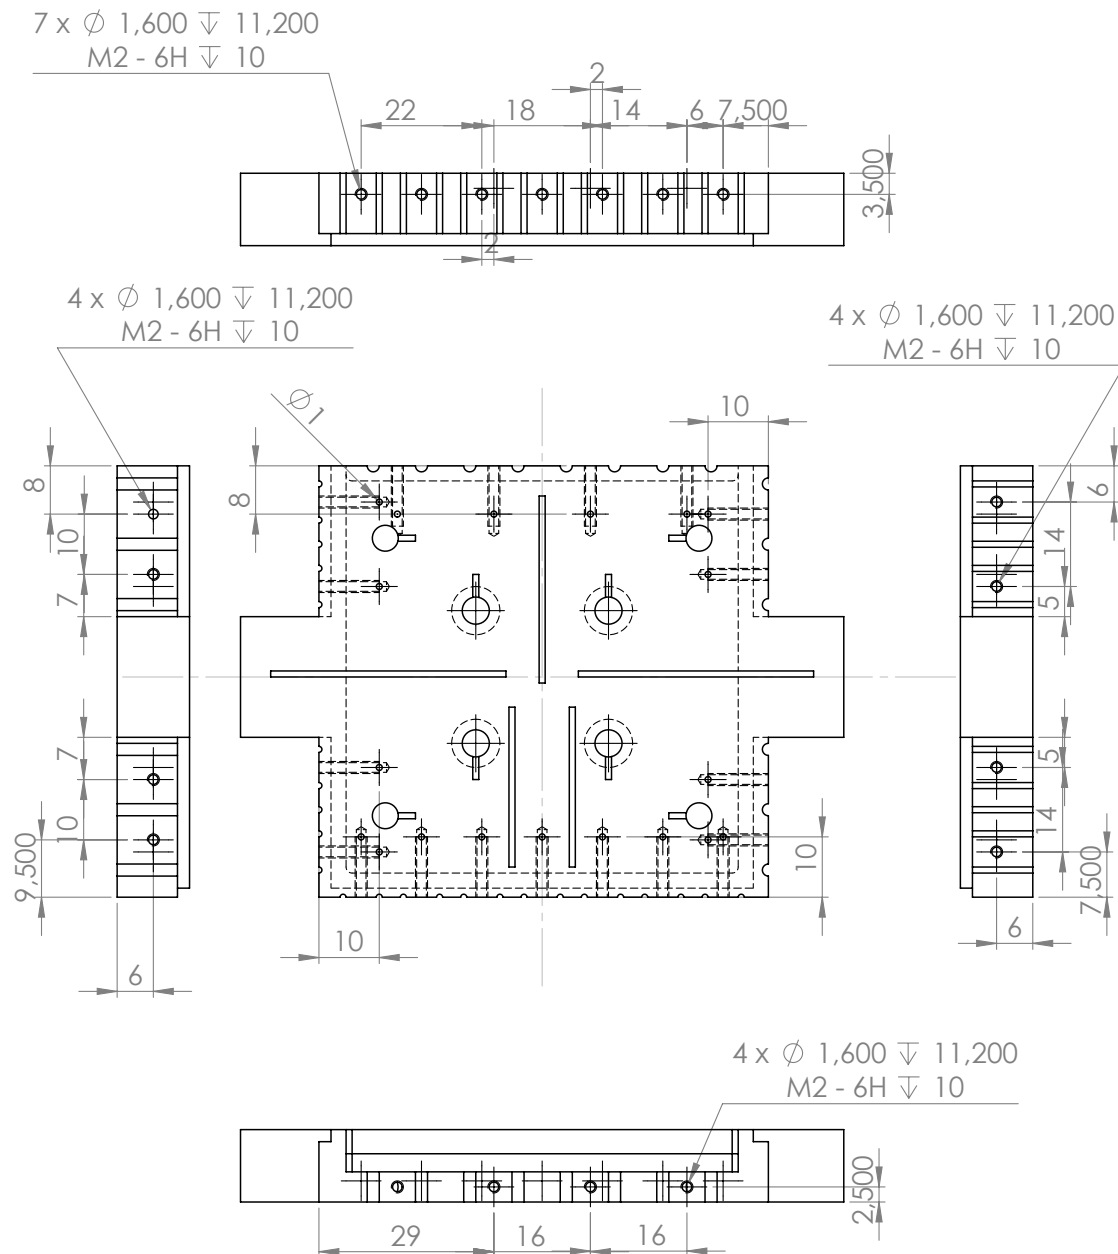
Technical drawing of the central piece, the copper block (Sheet 3 of 3).
